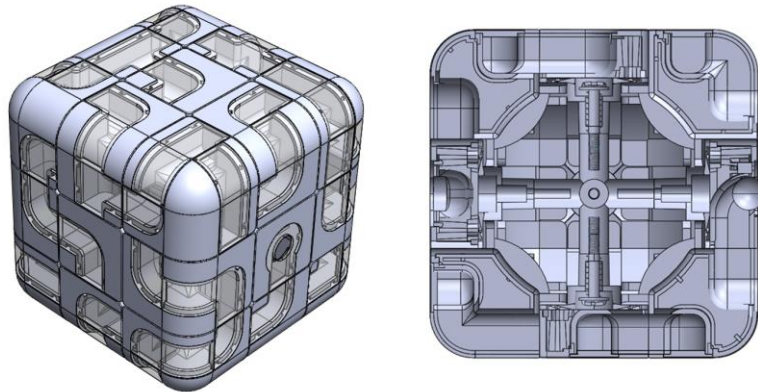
Shape (left) and cross section (right) of design completed U.CUBE
